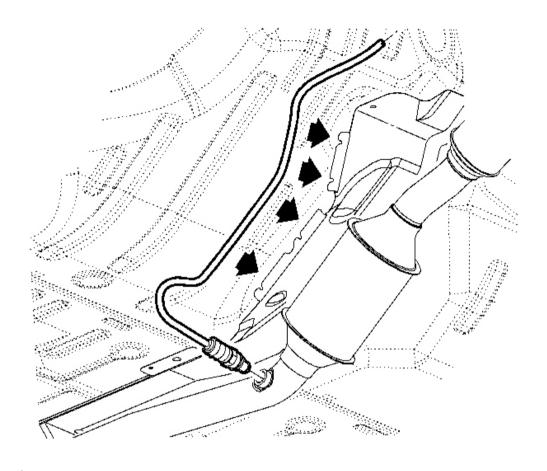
View Of HO2S-2 Harness Connector Courtesy of GENERAL MOTORS CORP.
